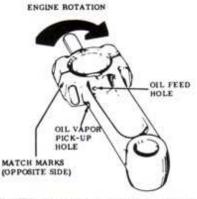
Connecting rods used on Models VH80 and VH100 have two oil holes.
